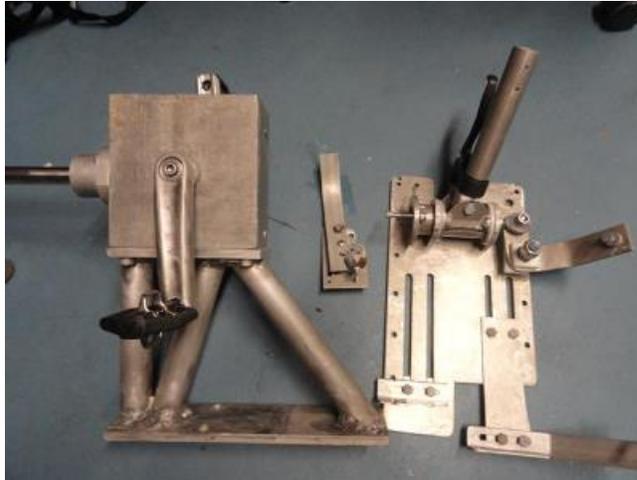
Gear Box, Deadman Latch, and Steering Assembly
